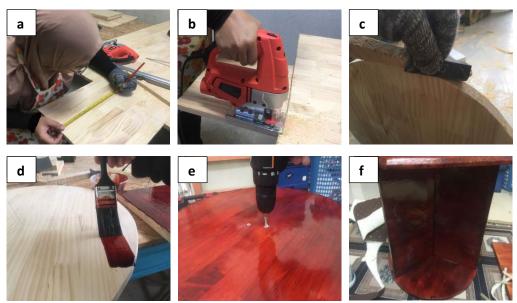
Manufacturing processes of coffee table (a) measuring using tape, (b) cutting using jigsaw, (c) sanding using sandpaper, (d) coating using brush (e) installing screw using hand drill
